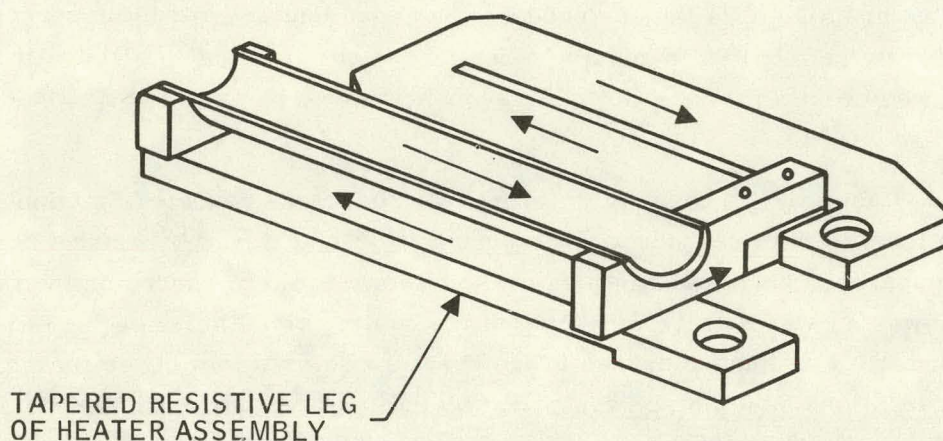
Drawing of Most Recent Trough/Substrate Heater Assembly for SCIM Coating Purposes
